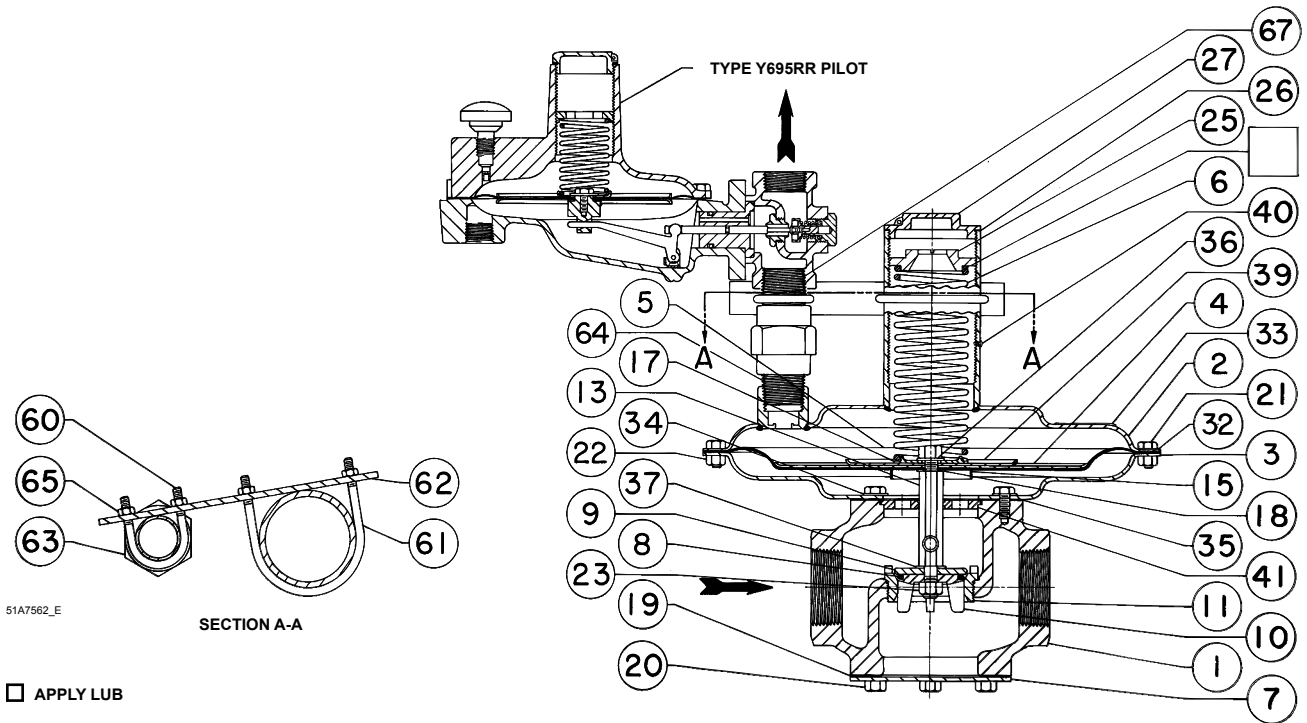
Type 66RR Main Valve and Pilot Mounting Parts
